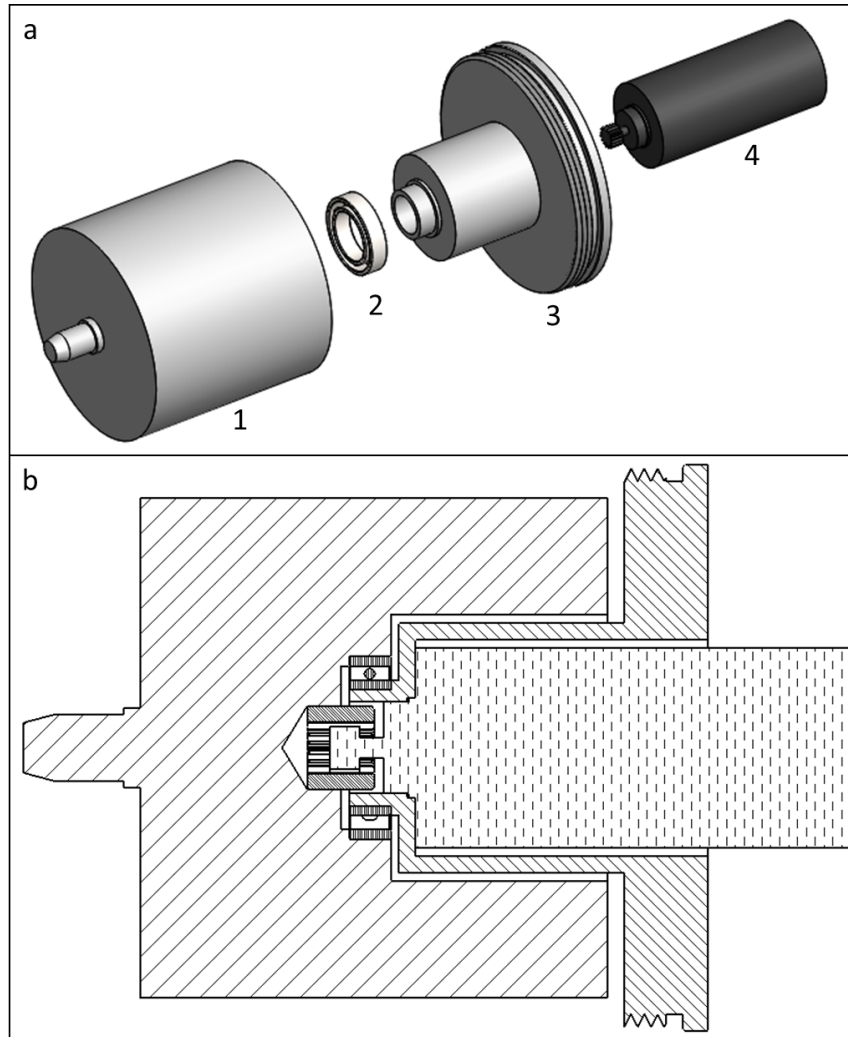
(a) Exploded view of the spin motor assembly with parts: 1. Spin mass assembly, 2. Spin motor bearing, 3. Spin motor mount, 4. Spin motor. (b) Cross section view of the spin motor assembly.
